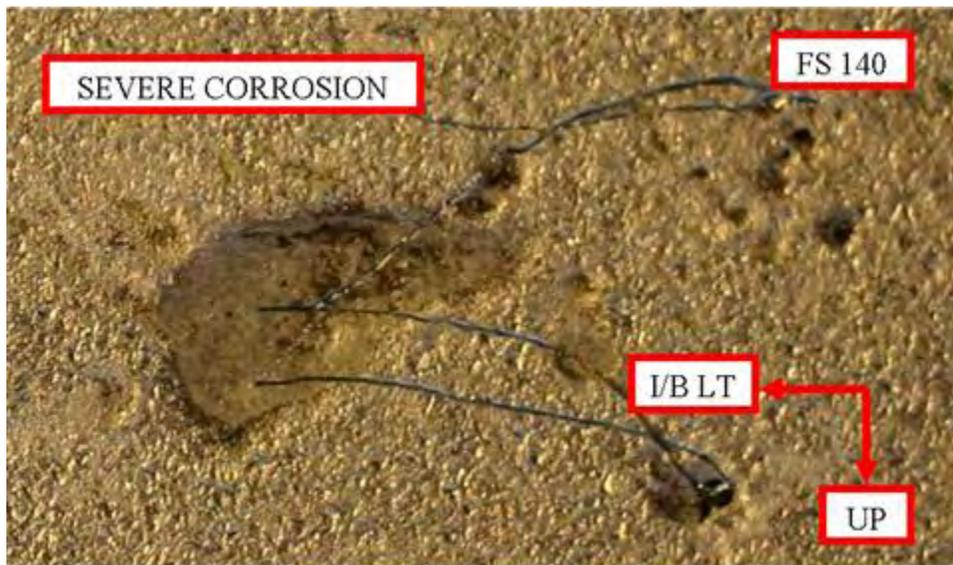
Macroscopic View of Crack on the Left Center Body Bulkhead FS 140
